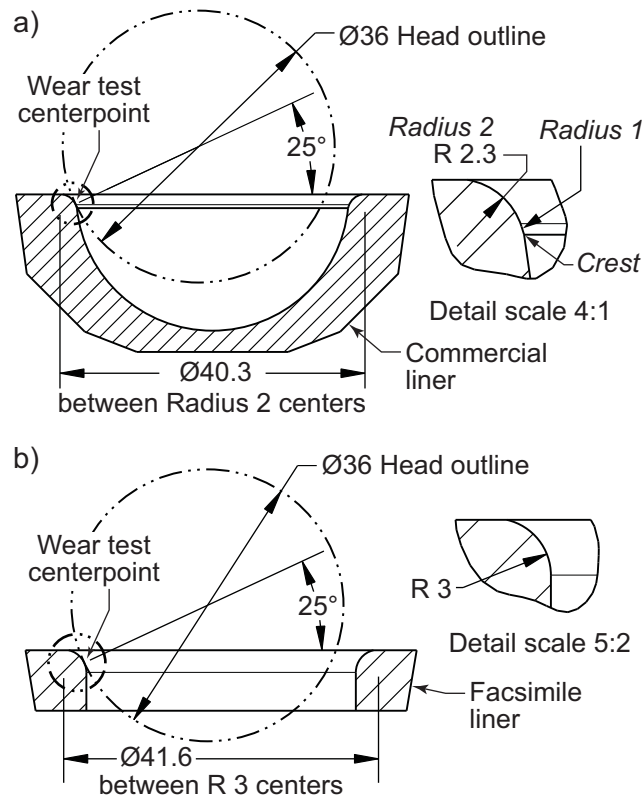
Section views of liner components showing wear test centerpoints and detail views of edges. a) Commercial liner (CL). b) Facsimile liner (FL). Dimensions in mm.
